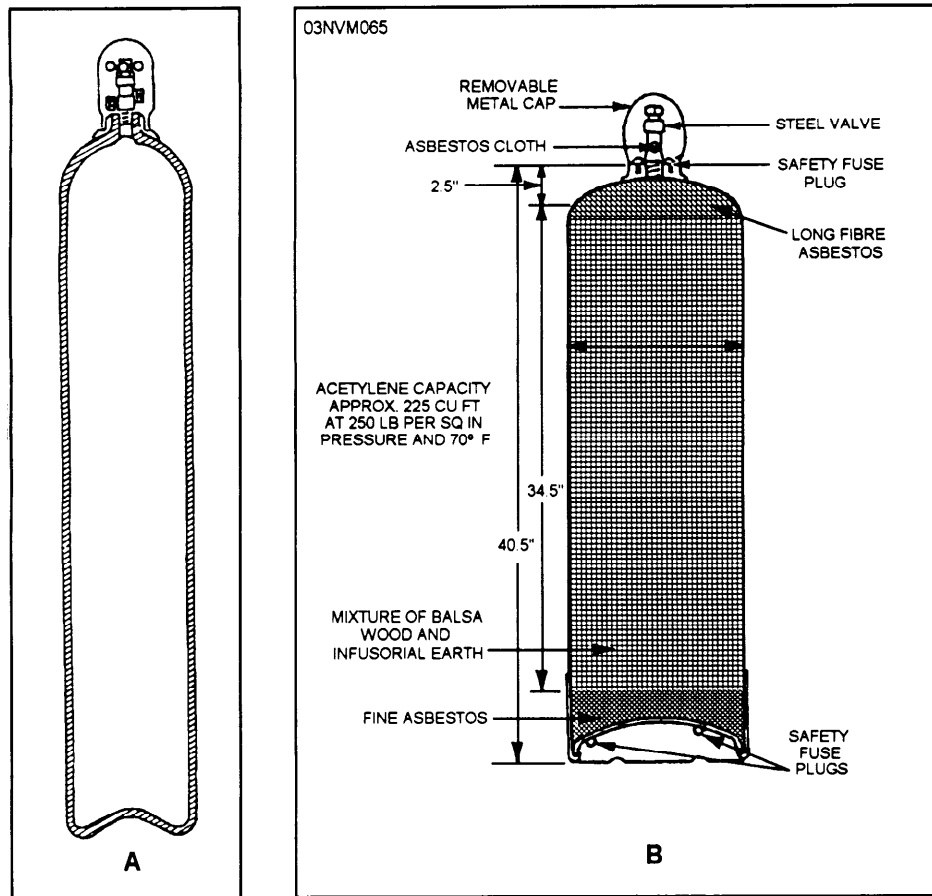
Cutaway view of compressed gas cylinders: (A) Oxygen cylinder; (B) acetylene cylinder.
